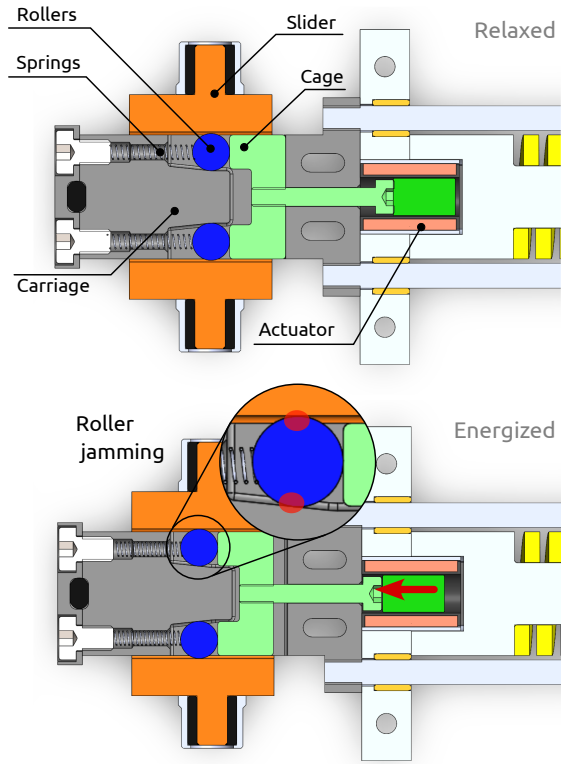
Locking mechanism operation (cut view): when energized, the actuator pushes the cage that brings the rollers in contact with the slider and carriage surfaces leading to a unidirectional wedging configuration.
